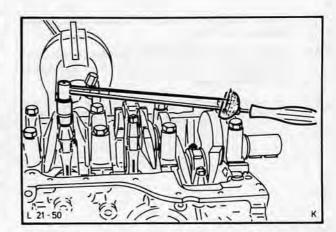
Torque connecting rod bolts as specified in Technical Data
